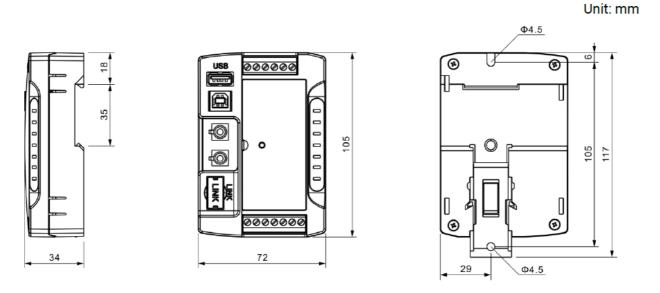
CMM366B-4G/CMM366CAN-4G Case Dimension
